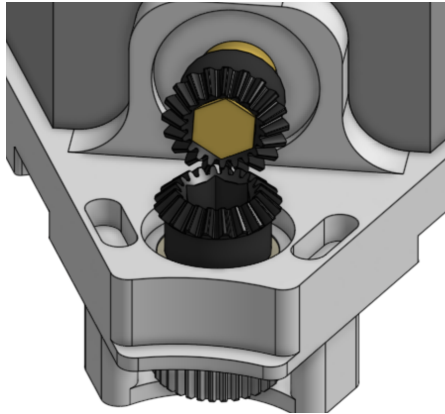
Matching bevel gear aligned to the bearing's hex bore.
